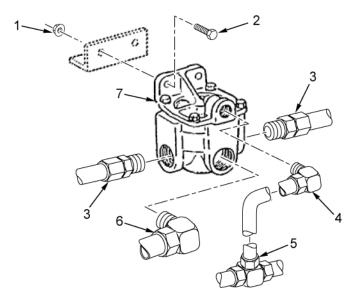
Location R, Adapters and Elbows from Air Pressure Relay Valve Removal.
